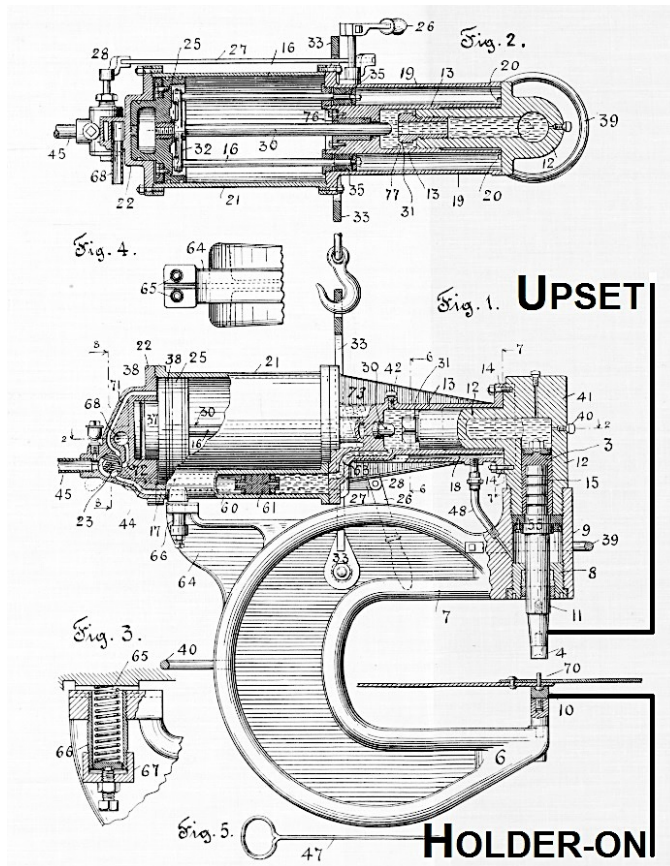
Portable pneumatic jaw riveter invented in 1901 by mechanical engineer John A. Carlisle from Philadelphia, PA, US (Carlisle 1901)
